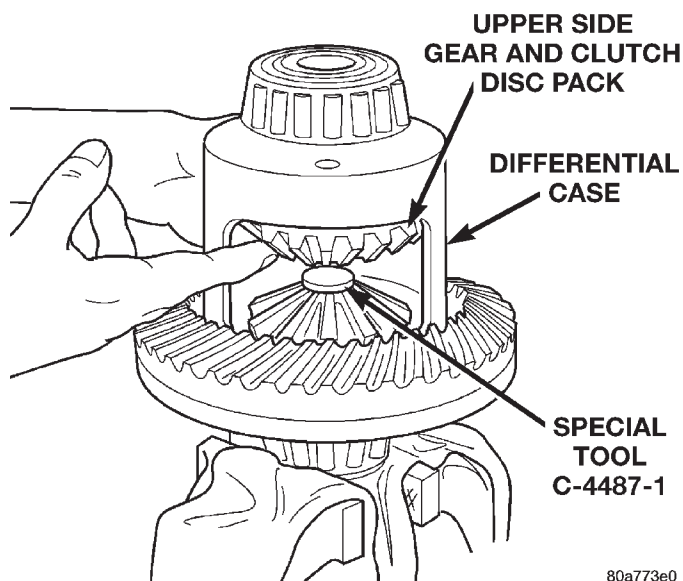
Upper Side Gear & Clutch Disc Pack Installation
